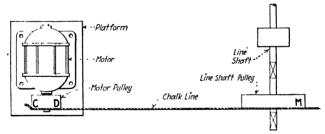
Motor shifted until its pulley bears against the line at C and D; MC is the reference line.
